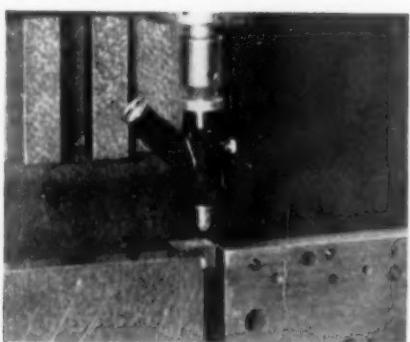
Edge Block is set on angle plate, perpendicular to line of table travel, and through Center Scope, the machine spindle is aligned with this edge of angle plate. Moving table cross-wise 2.875-in. and length-wise .3437-in. (see fig. 10), spindle is ready.
